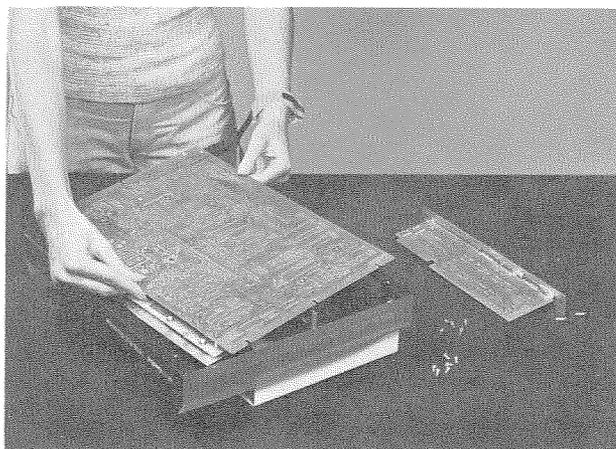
Removal of the MB board. The ribbon cable must be disconnected first. Prior removal of the display board also is highly recommended. Because the board is partially enclosed by the main chassis, some motions are necessary: toward front, disengaging bias connector, tilting, turning as shown, and toward the rear.
